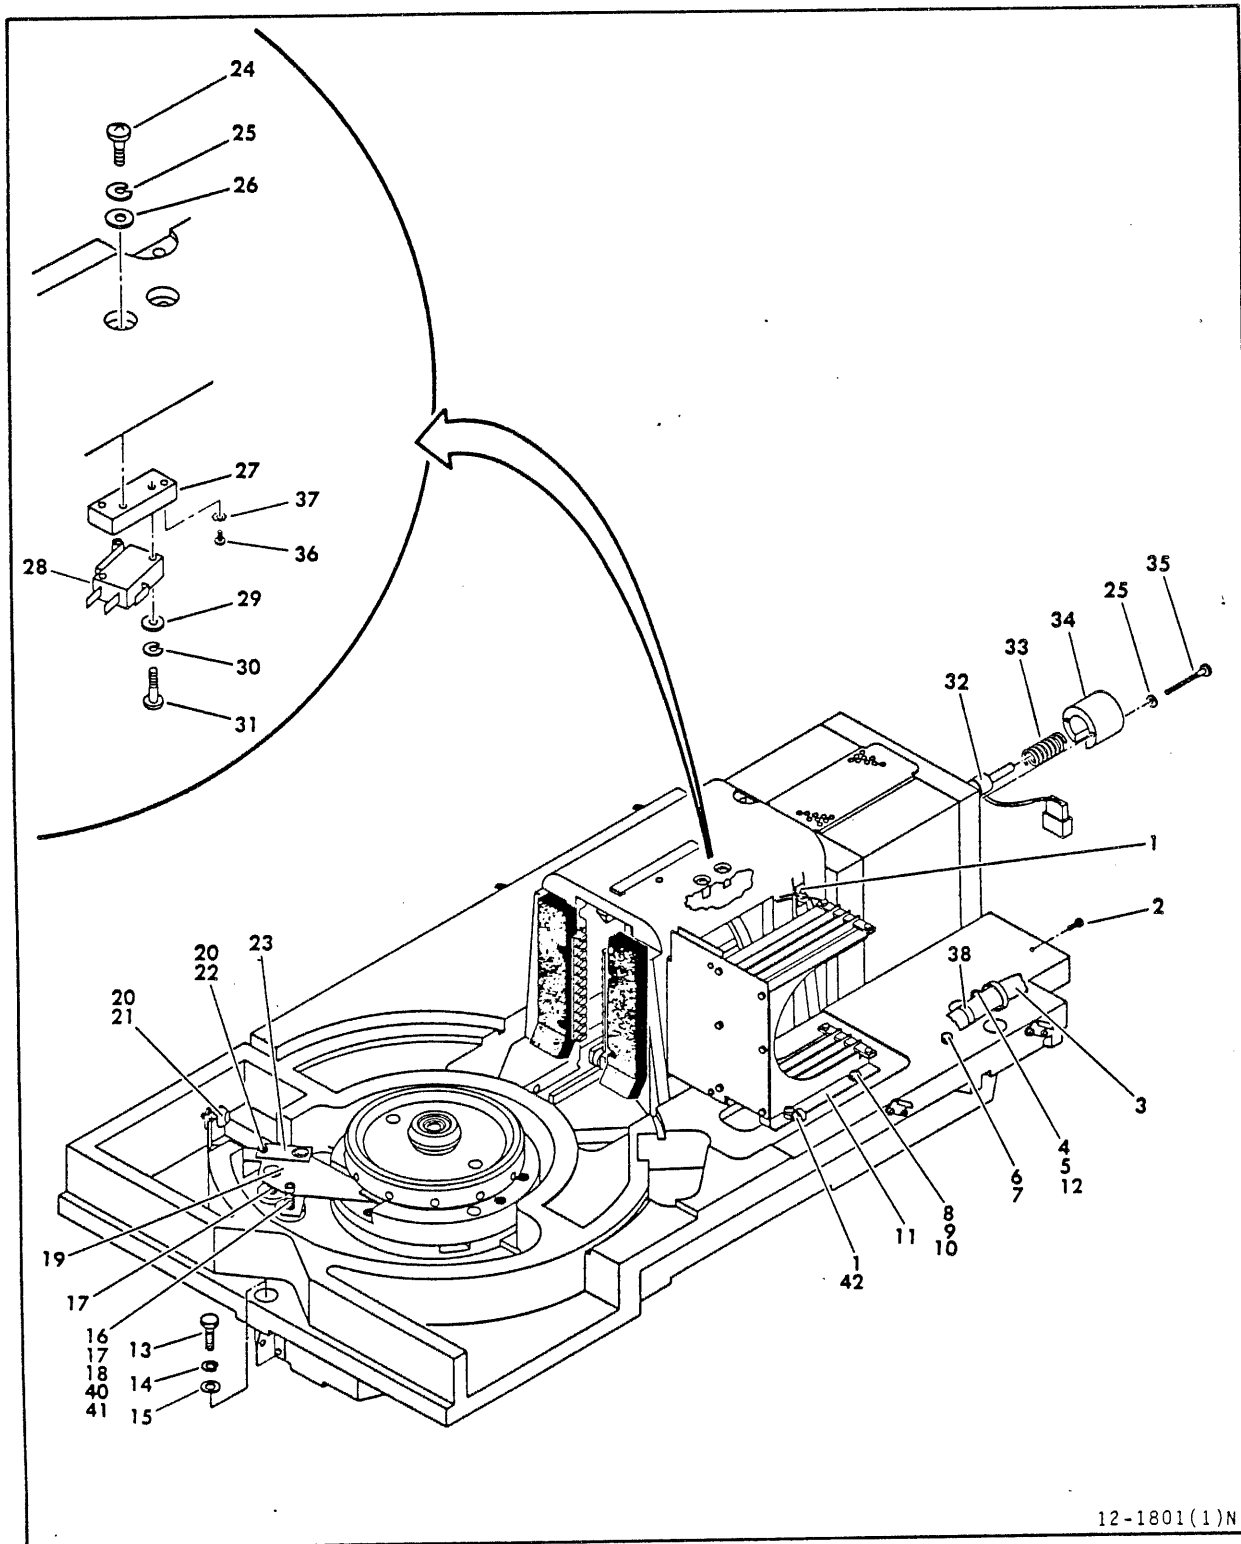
A-20. Deck Assembly (Sheet 1 of 3)
